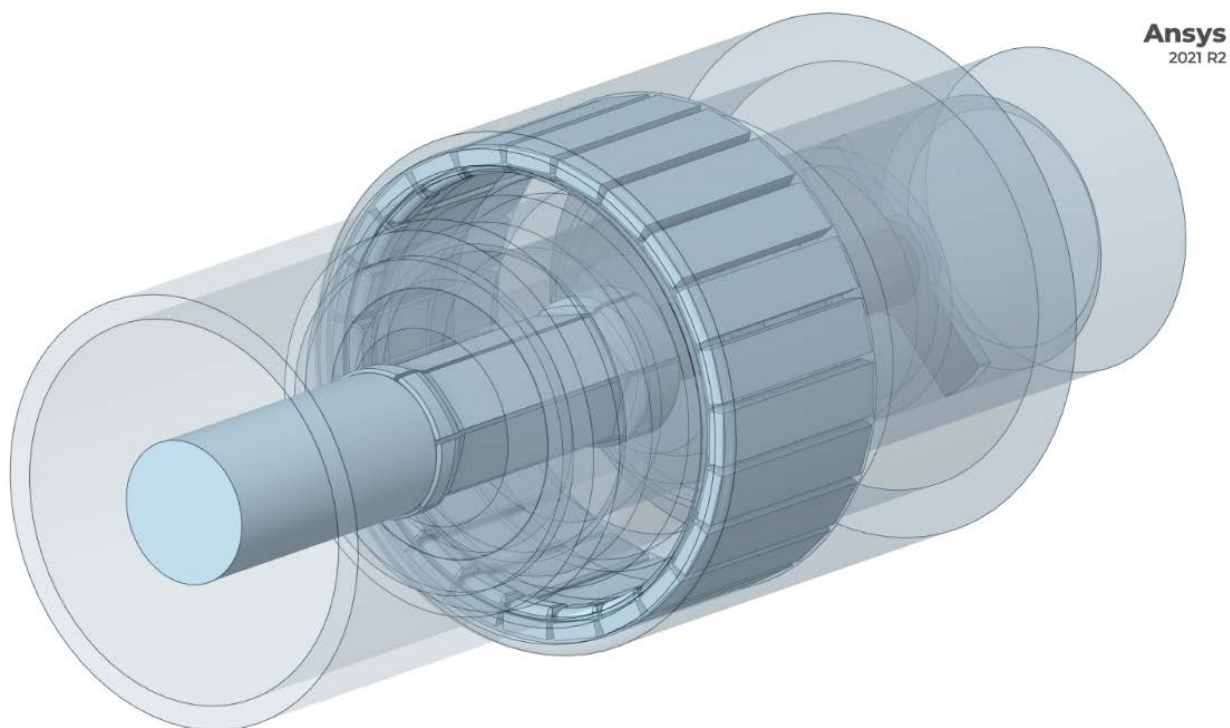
Optimized geometry of HV breaker in Ansys space claim module.
